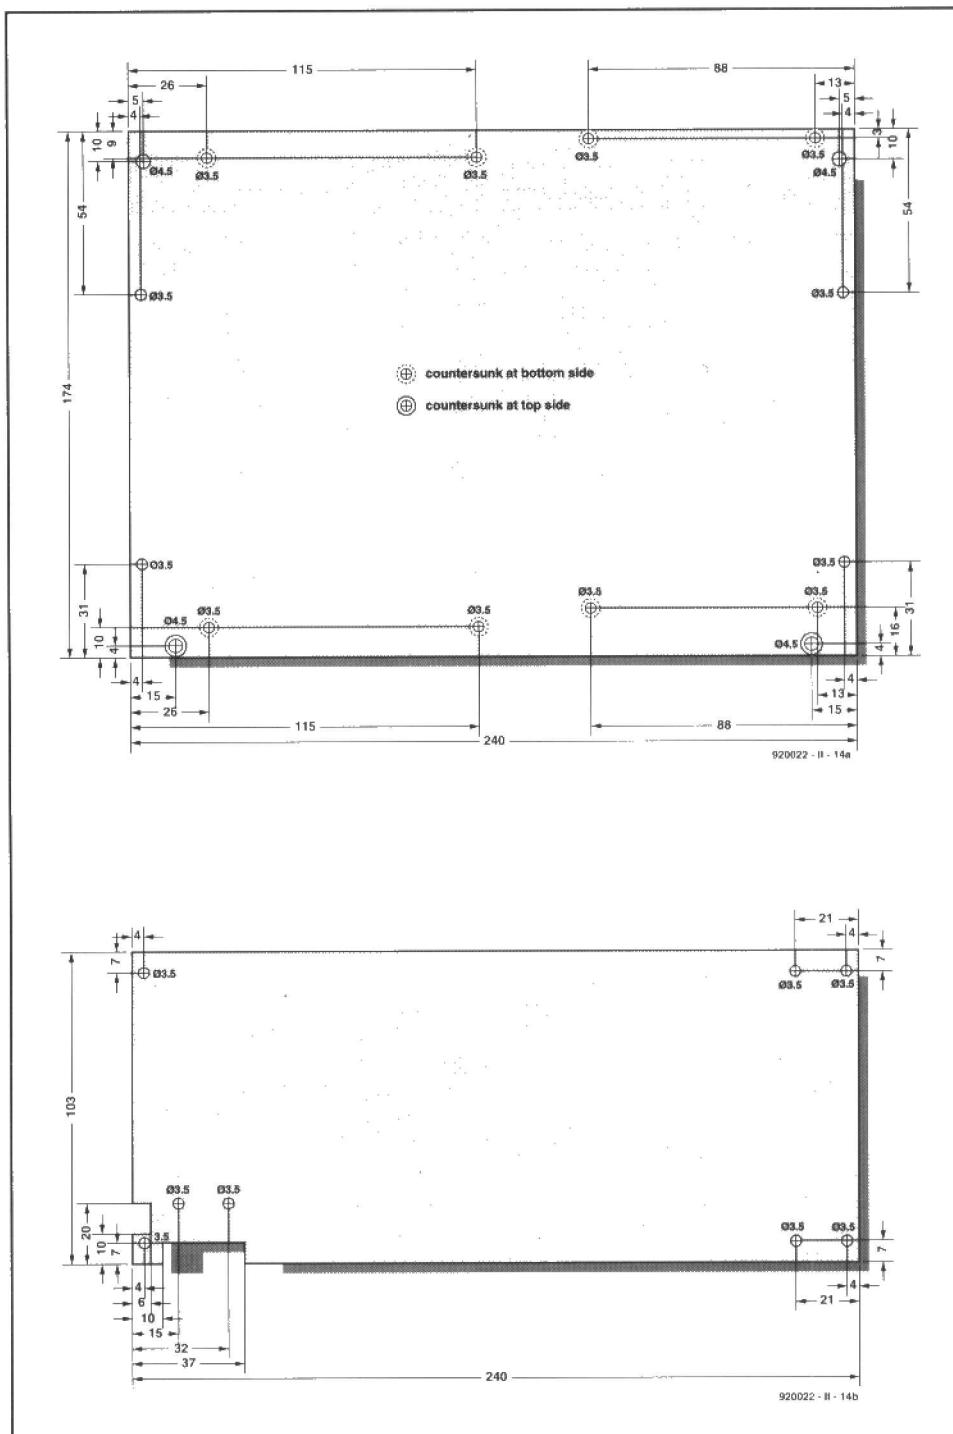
Drilling details of the two mounting plates in the enclosure.
